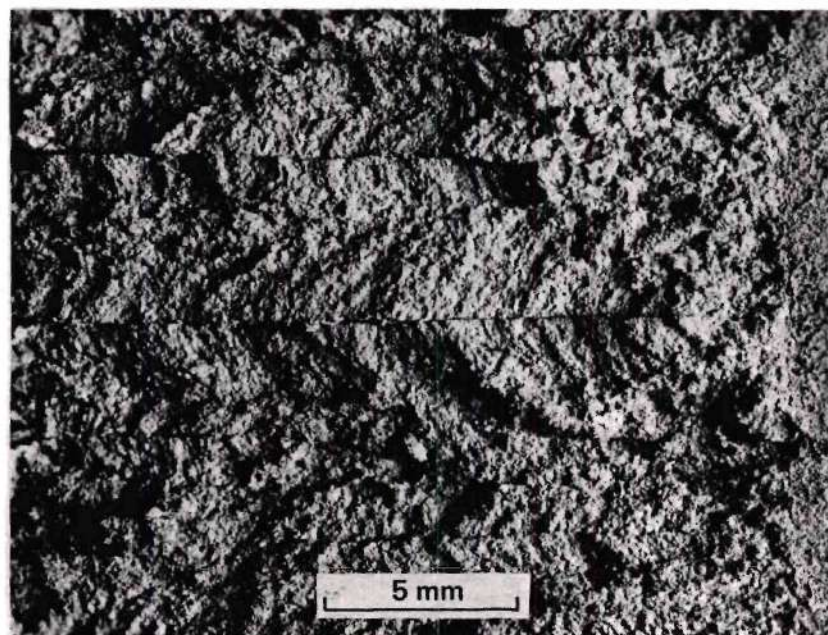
Closeup of Chevron-like Markings on SCC Fracture Surface.
